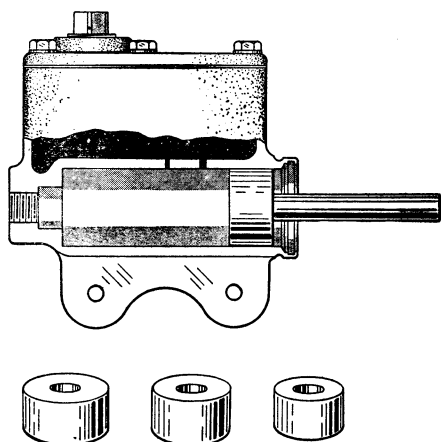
Using No-Go gauge when inspecting master or wheel cylinder (master cylinder shown)
